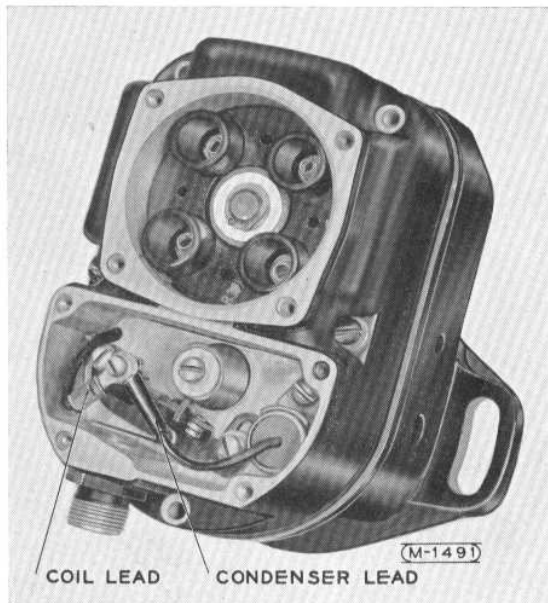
Correct Assembly of Lead Assembly to Breaker
